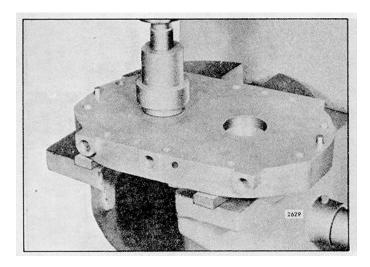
Installing Oil Seal Ring Collar in End Plate with Tool J 6270-3
